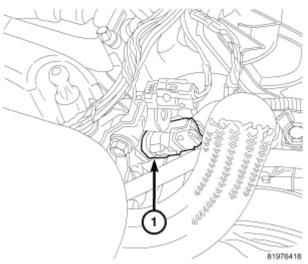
OIL TEMPERATURE SENSOR Courtesy of CHRYSLER LLC
